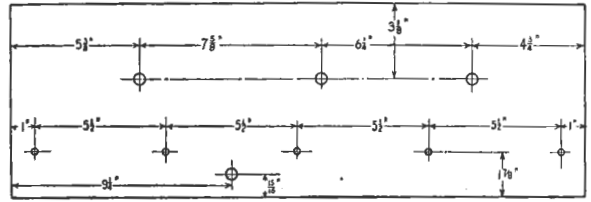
Panel drilling diagram. It is essential that these dimensions be followed accurately, so that the components will fit into their appointed places.
